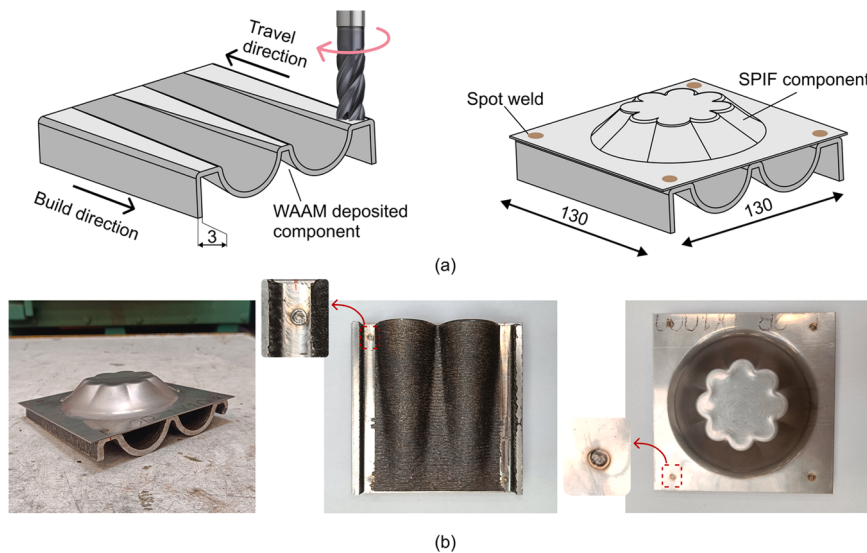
The proof-of-concept prototype showing: (a) the conceptual drawings and dimensions (in millimetres) of the AM deposited along with the final assembled part, and (b) details of the upper and lower parts produced with the various processes involved in the hybrid manufacturing approach.
